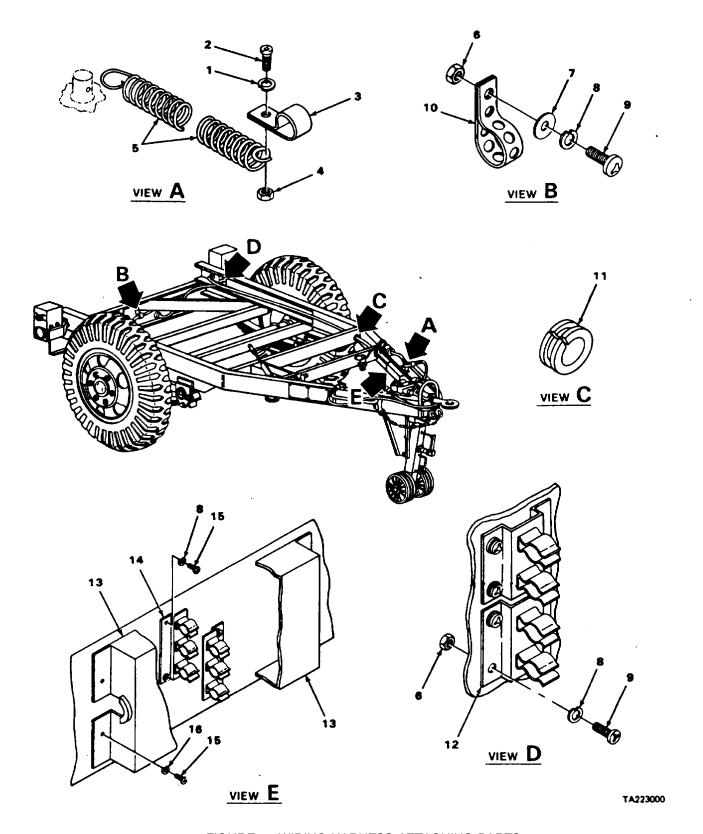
WIRING HARNESS ATTACHING PARTS.
